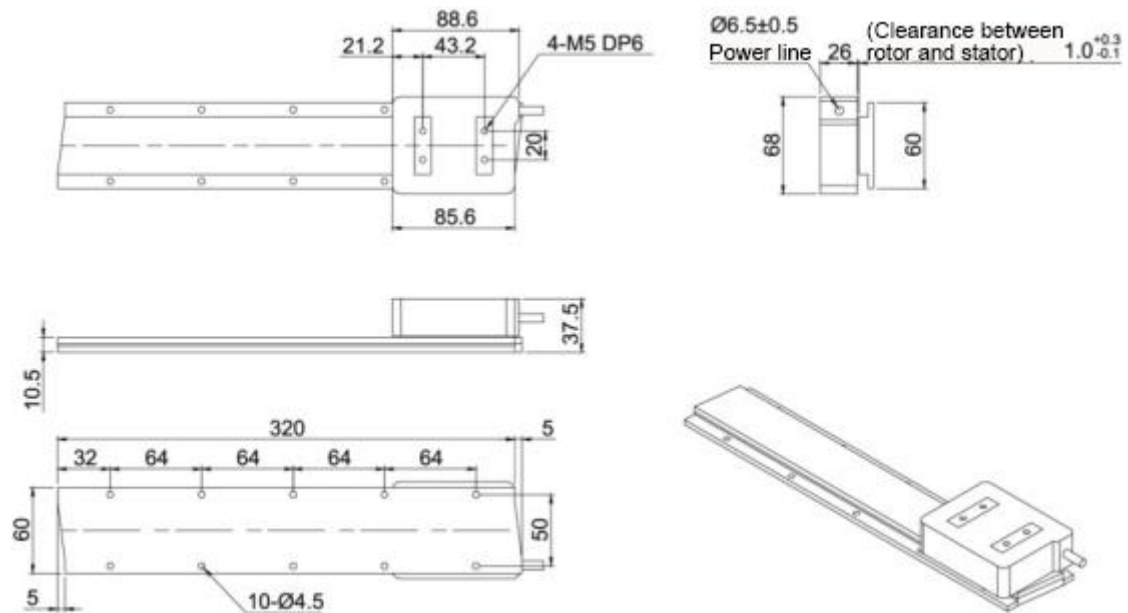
Dimensional drawing of WZCR-AZ45C1-□ motor
